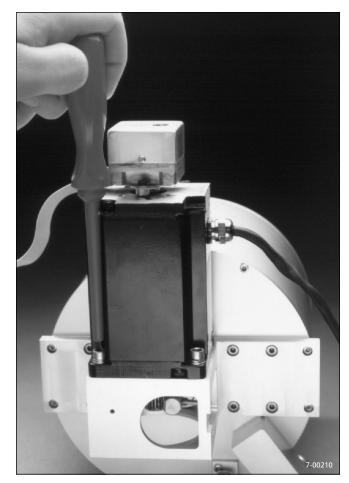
Gear mesh procedure: Tightening screws to slightly compress spring washers
